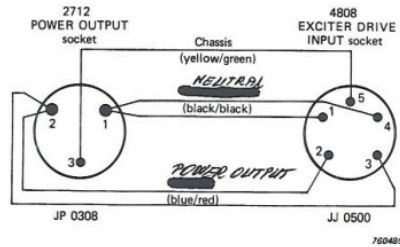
Drive Cable AQ 0095. Soldering side of plugs shown
